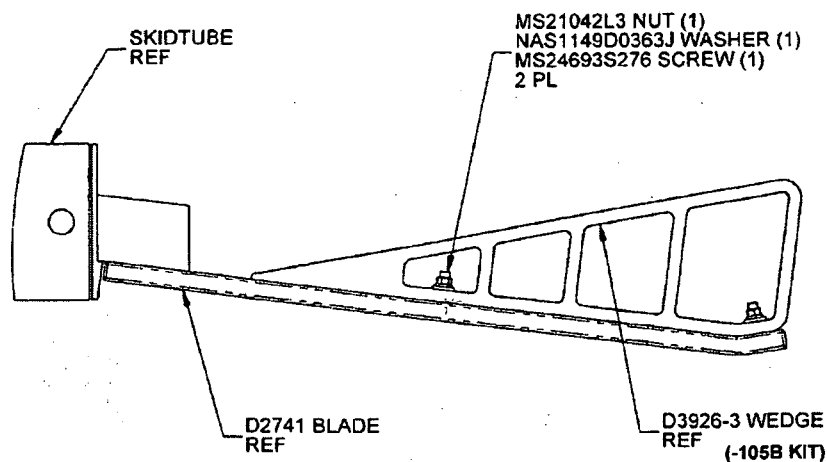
D350-636-105A/-105B WEDGE KIT INSTALLATION
